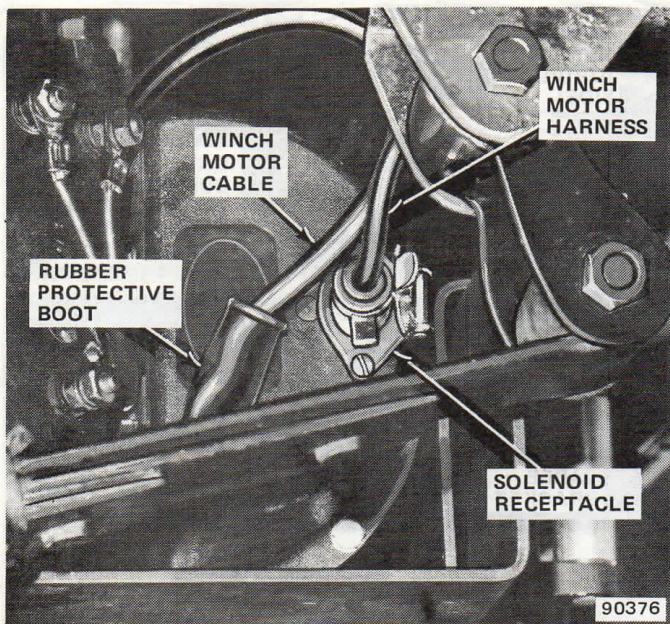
Connecting Winch Motor Harness to Solenoid Receptacle
